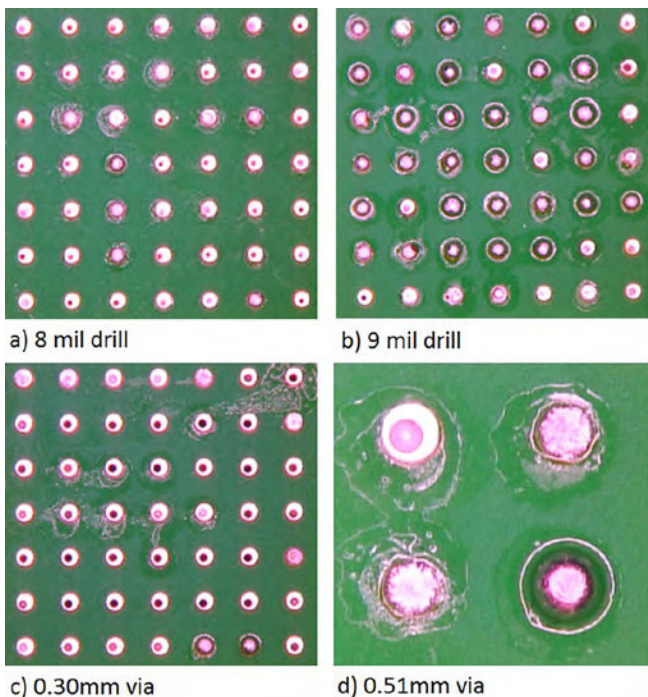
Solder protrusion images for 8, 9, 12, and 20 mil reflowed using 3.2 mm thick board.
